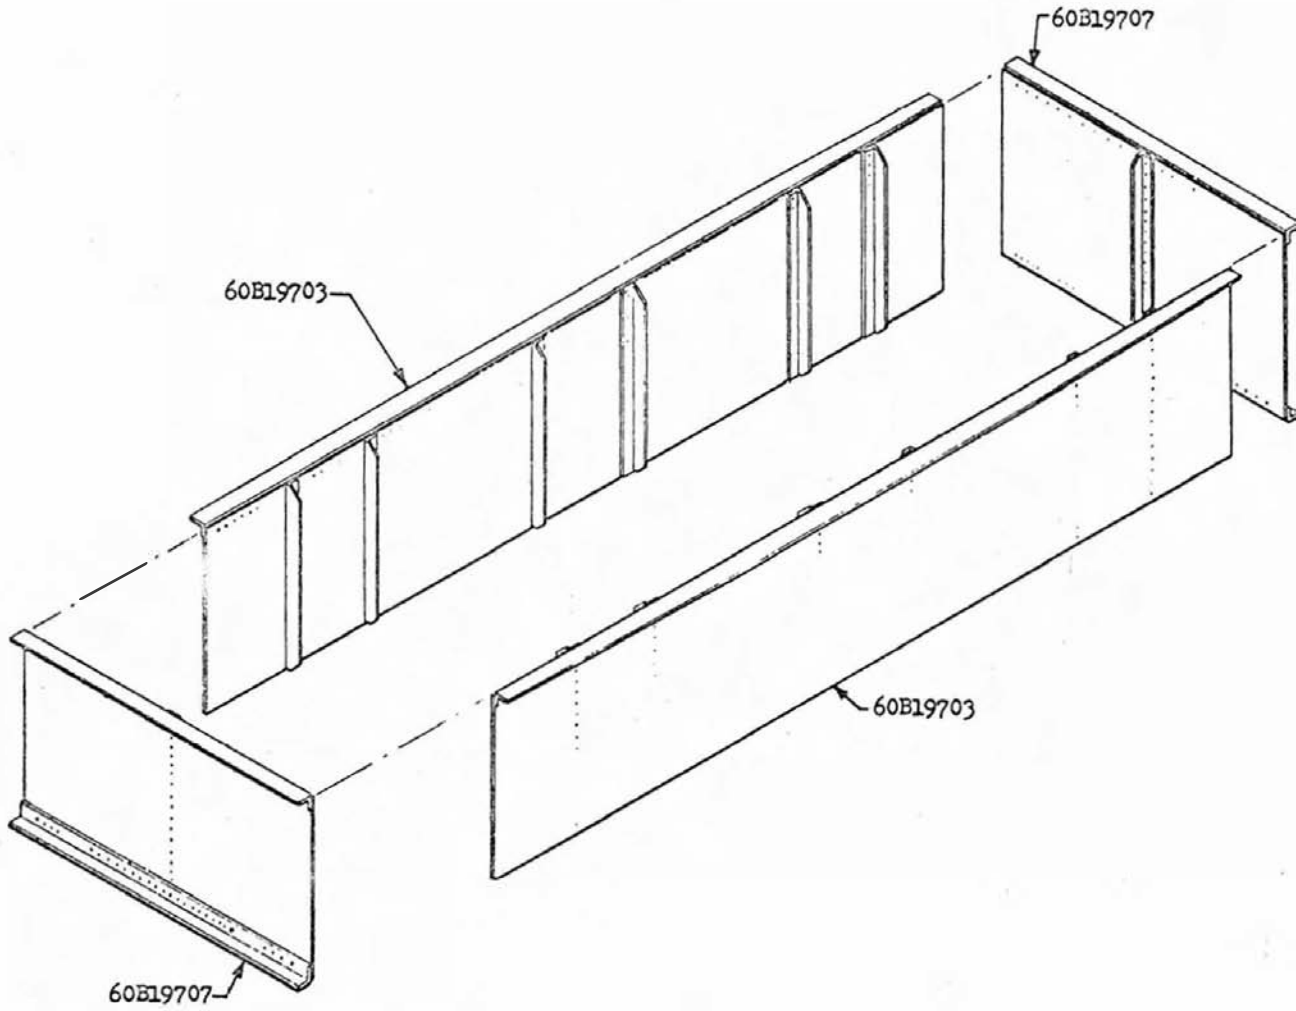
Outboard Propellant Duct Support Assembly 60B19702
